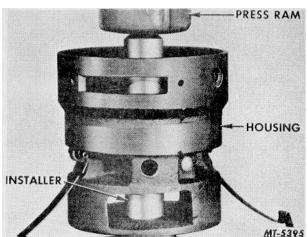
Pressing Seal Retainer into Housing Using Installer SE-1955-8
